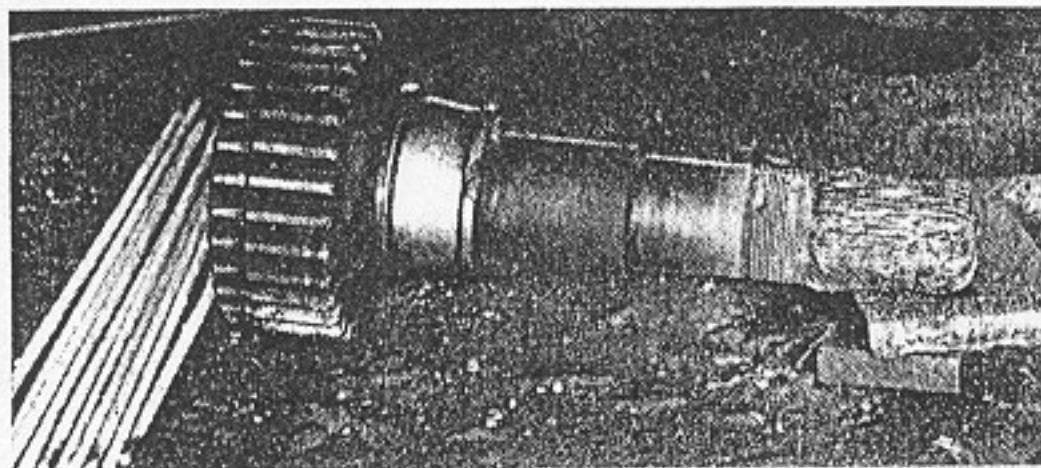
Arc welding was used to build up damaged threads on part of a truck differential.
